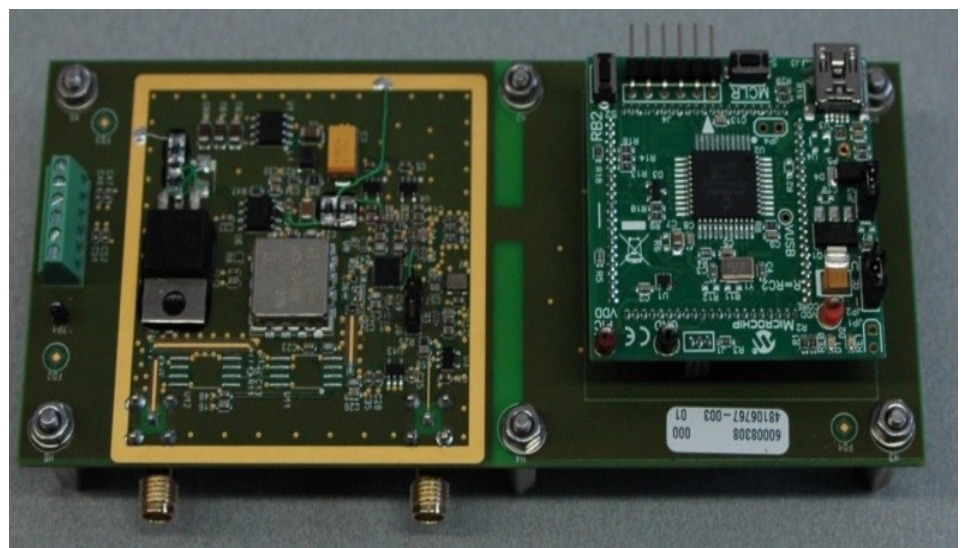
Picture of the assembled PCB containing the PLL chain, power handling and PIC.
